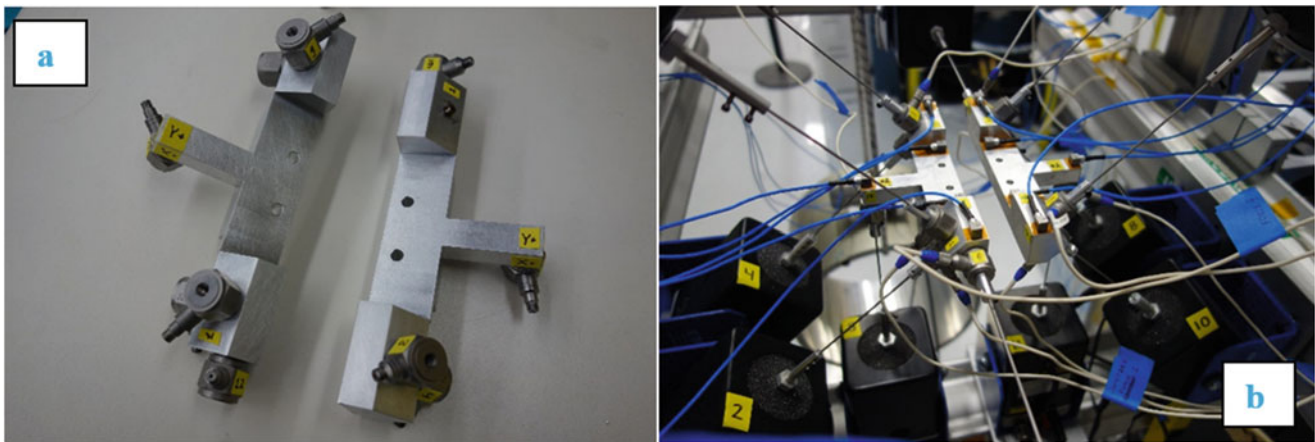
(a) ICE fixtures and (b) instrumented ICE fixtures in test setup
